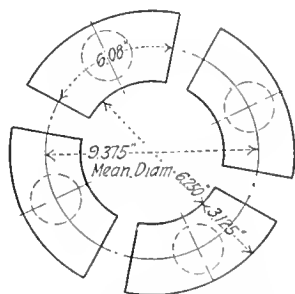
ARRANGEMENT OF SHOES IN THE THRUST BEARING TESTED
